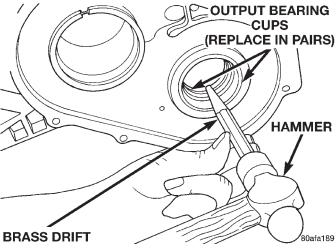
Remove Output Bearing Inner Cup CAUTION: Drift bearing cup all the way around.
